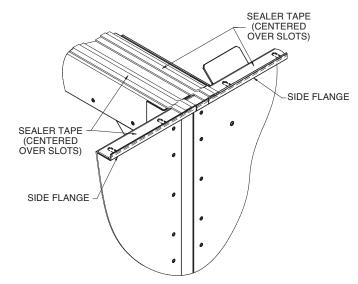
Sealer Detail for Center Joint of Units with Two of More Casing or Fill Sections
